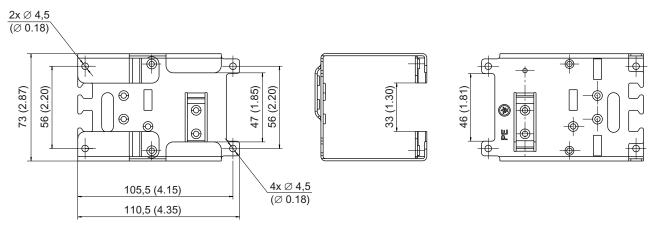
Dimension drawing, screening kit, frame size FSA, all data in mm (inches)
